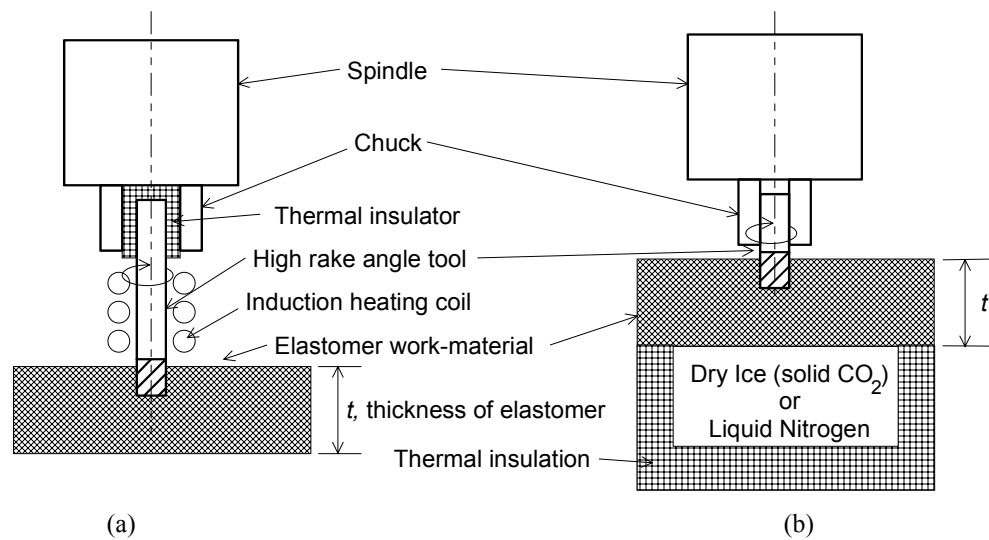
Two new concepts for elastomer machining: (a) induction-heated tool machining of elastomers, and (b) machining of cryogenically cooled elastomers.
